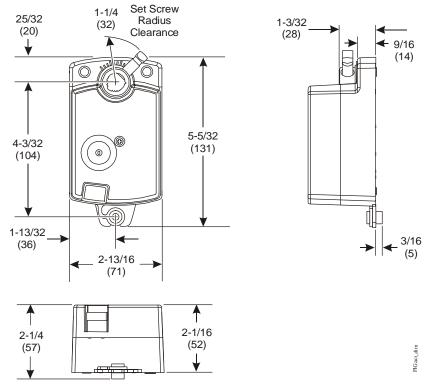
M9104 Series Electric Non-Spring Return Actuator Dimensions, in. (mm)
